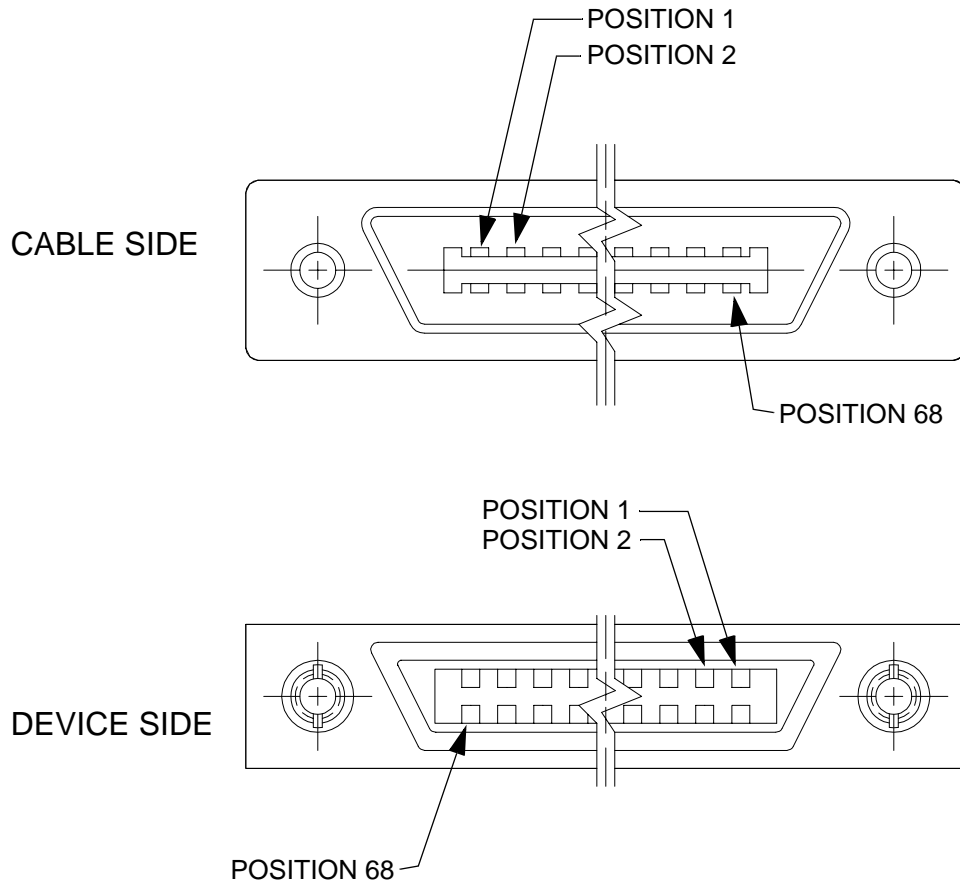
68-contact alternative 4 shielded contact positions (P cable)
